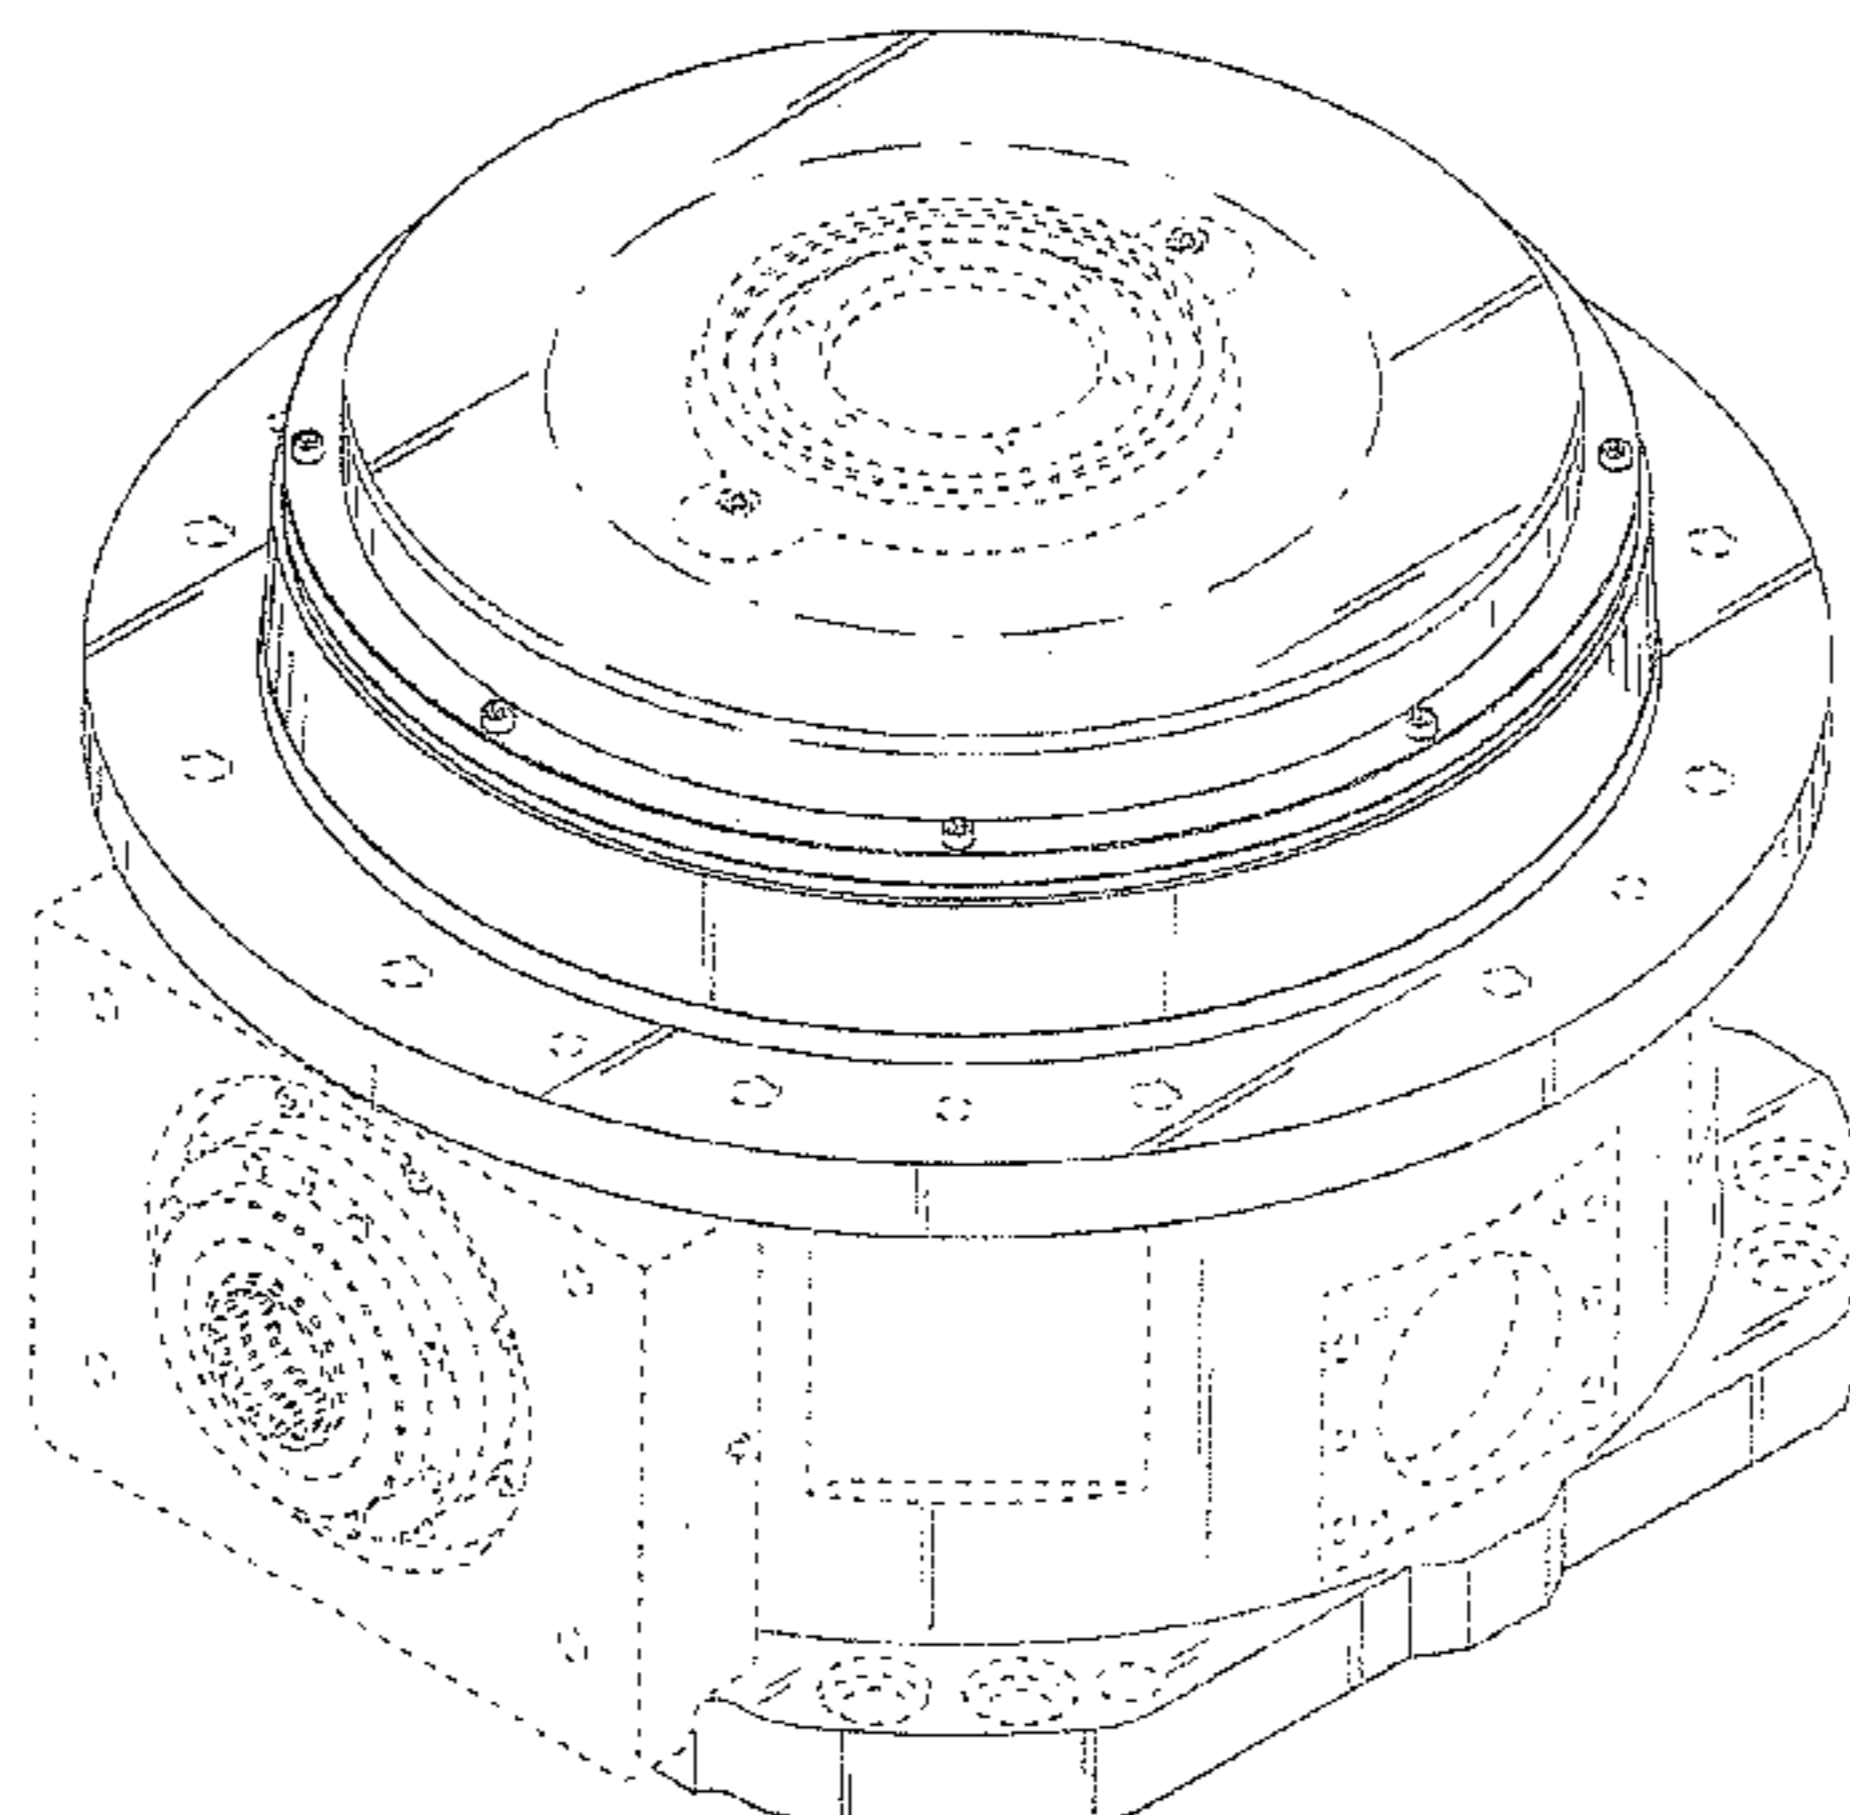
is a top, front, right side perspective view of a reduction gear;
